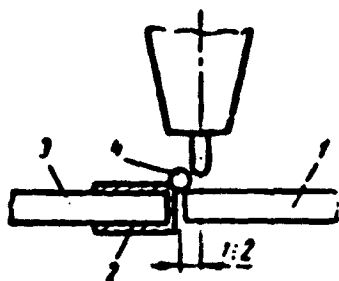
Scheme of argon arc welding of aluminum alloys to steel [94]:
